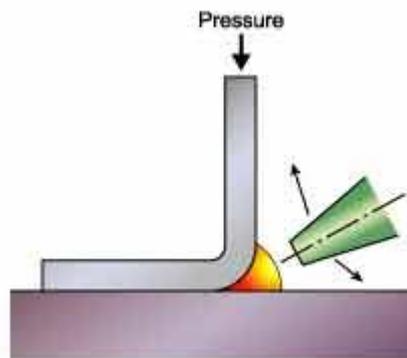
Hot gas hand welding nozzle motion and rod angle
